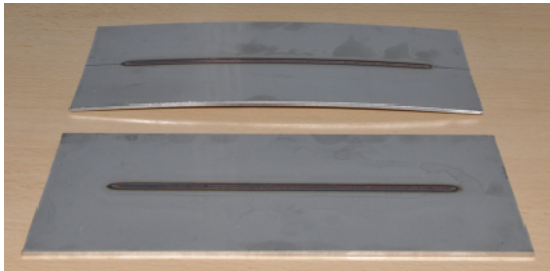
As-welded specimens of conventional welding (upper) and heat sink welding (lower).
